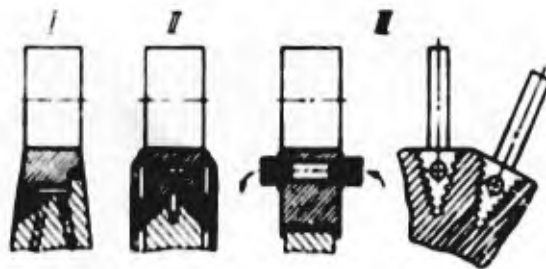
Diagrams of coolant systems of blade roots. I-blades made in one piece with a top part of the disc, II -blades welded to the disc, III-blades with a "herringbone" lock.
